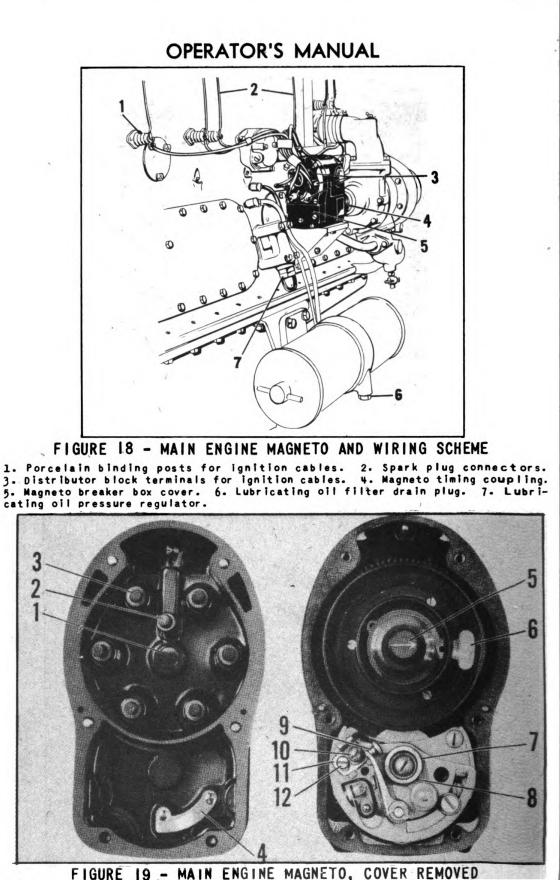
MAIN ENGINE MAGNETO, COVER REMOVED 1. Inspection window. 2. Center distributor brush. 3. Distributor brush. 4. Grounding plate. 5. Indicator arrow - shows position of distributor rotor segment. 6. Distributor rotor segment. 7. Interrupter cam. 8. Cam lubricating felt wick. 9. Contact points. 10. Contact bracket fastening screw. 11. Con-"ct bracket. 12. Adjusting screw.
